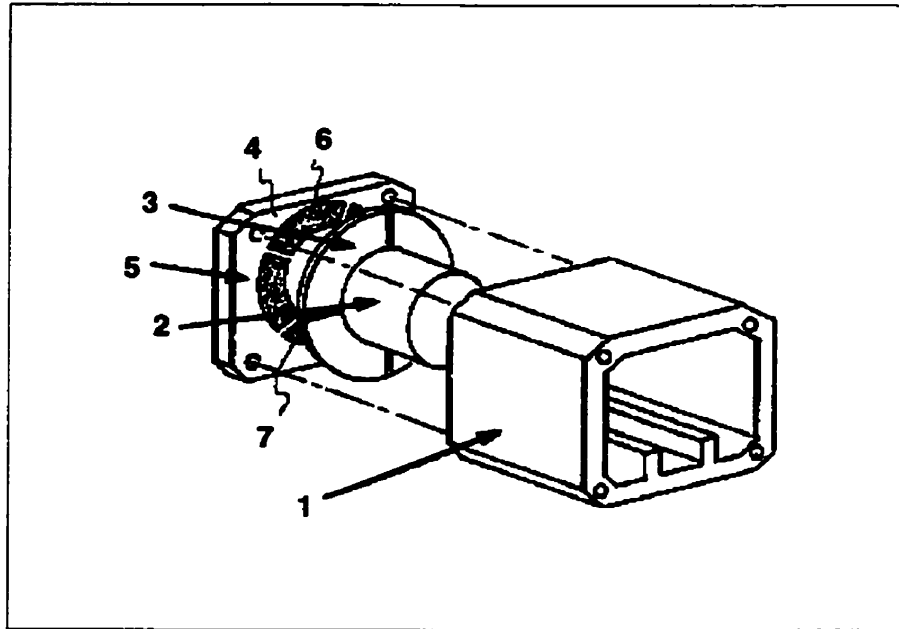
Etak Gyro Exploded View (Phillips et al. 1989)
